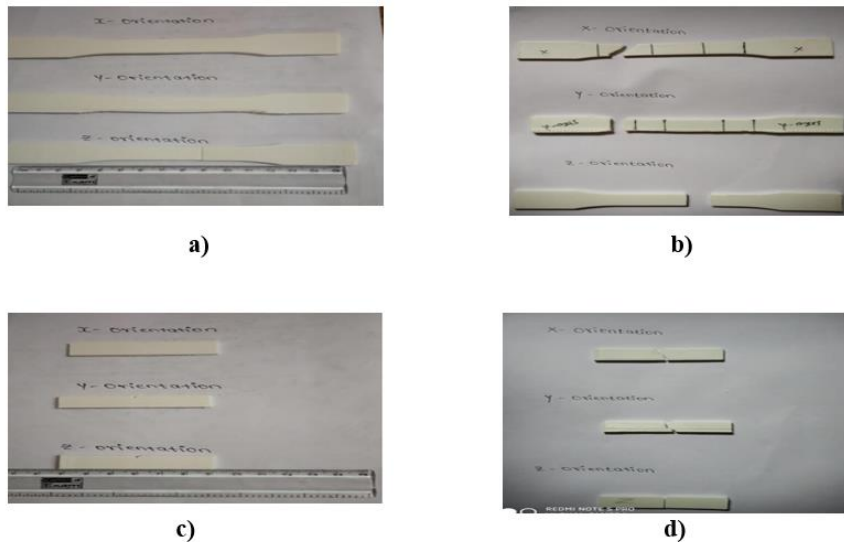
Fabricated test specimens built with different orientation using 3D printer
